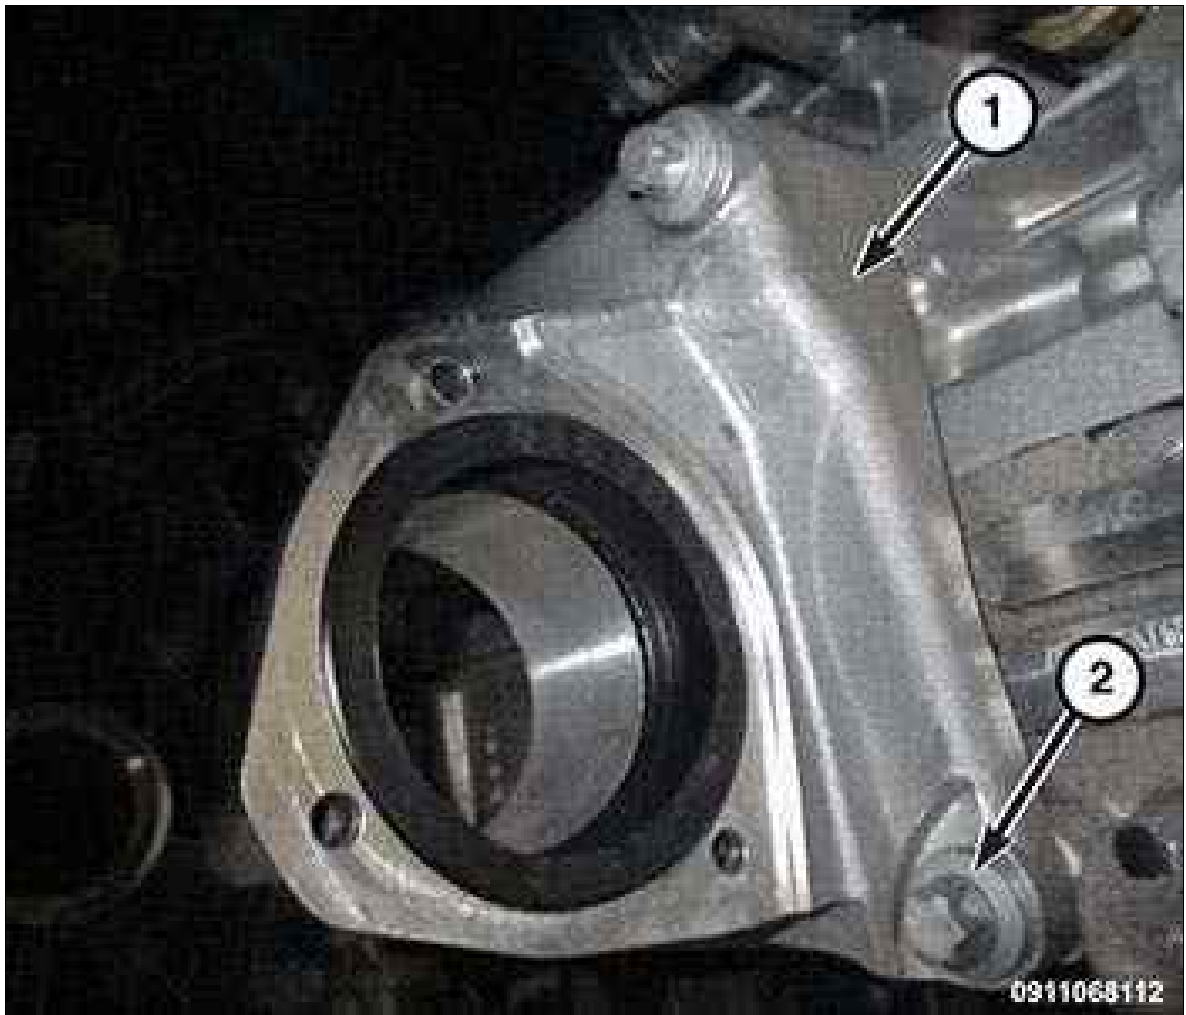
Generator Mounting Bracket, Accessory Belt Tensioner & Bolts
